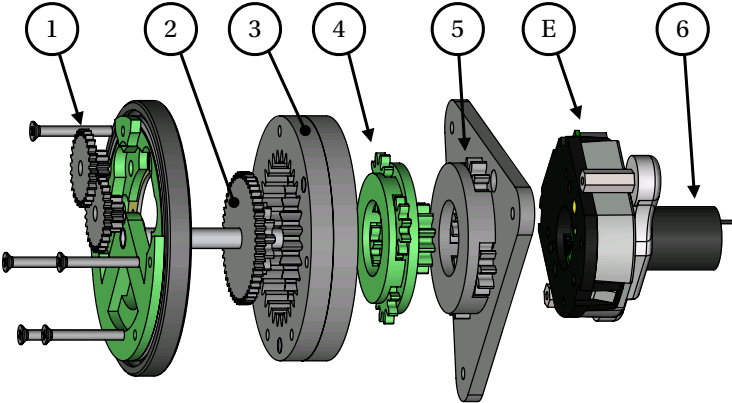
Exploded view of the Gearbox C design (motor not shown). The labels correspond to the labels of the exploded view in Figure 4.1. This design also incorporates a 12-bit absolute encoder (E) at the gearbox output.
